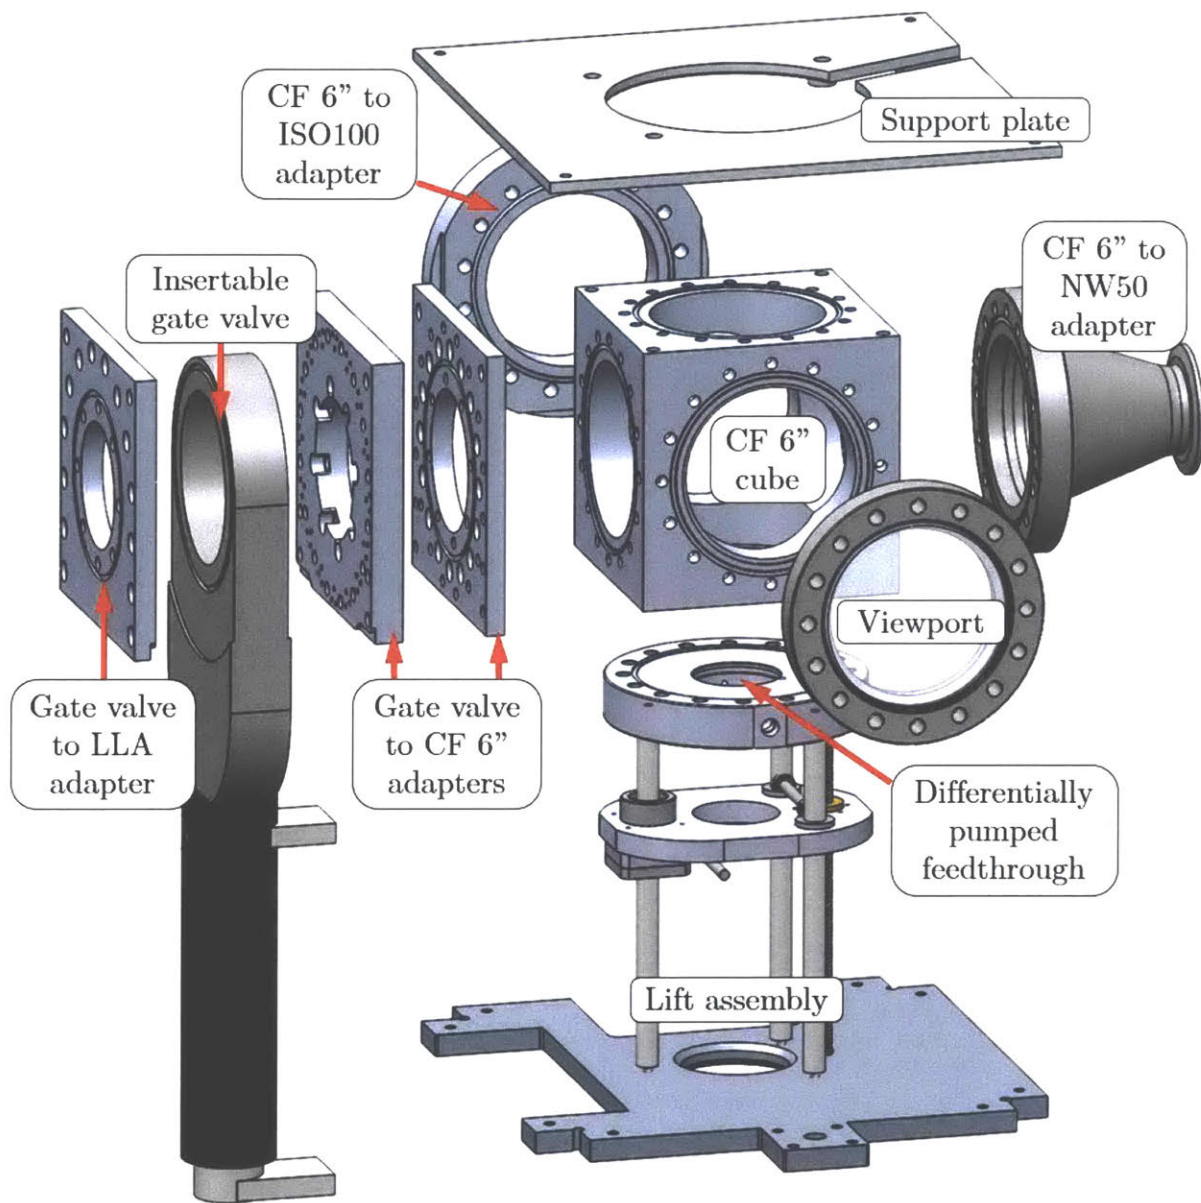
Exploded view of the LCA with labels for the major components. Not shown are the support legs, which attach to the support plate and lift assembly.
